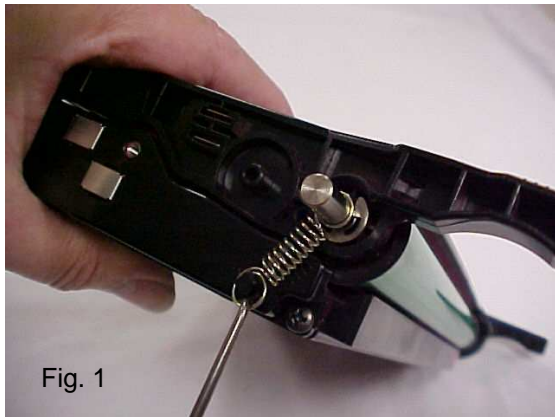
Remove the tension spring that is attached to the drum axle and contact plate.
